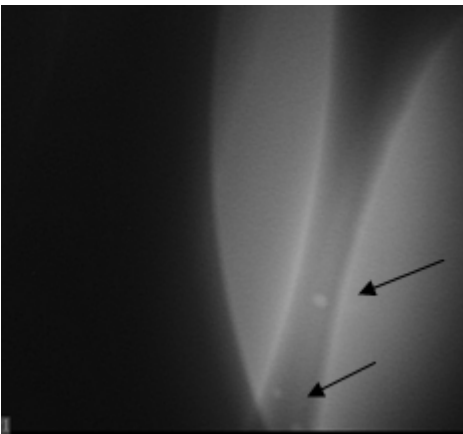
Surface defects detected through radioscopic inspection.
